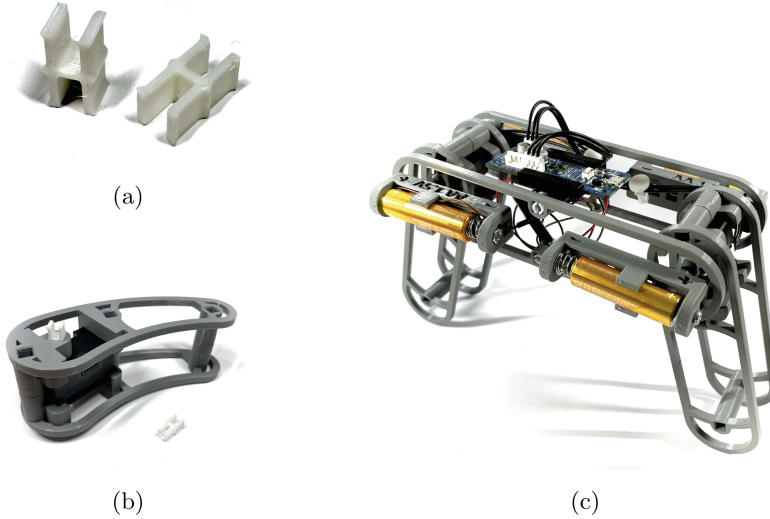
(a) Universal, H-shaped pins that are used to manually connect and disconnect two components. (b) A limb consisting of two separately printed parts with a motor clamped in-between. (c) A fully assembled and deployable embodiment of the Tablebot morphology with a processor and batteries.
